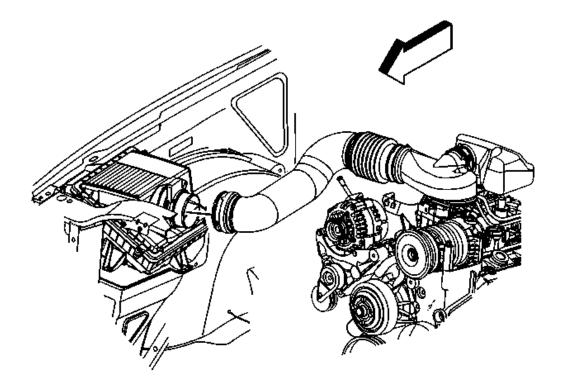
View Of Air Cleaner Outlet Duct Clamp Courtesy of GENERAL MOTORS CORP.
